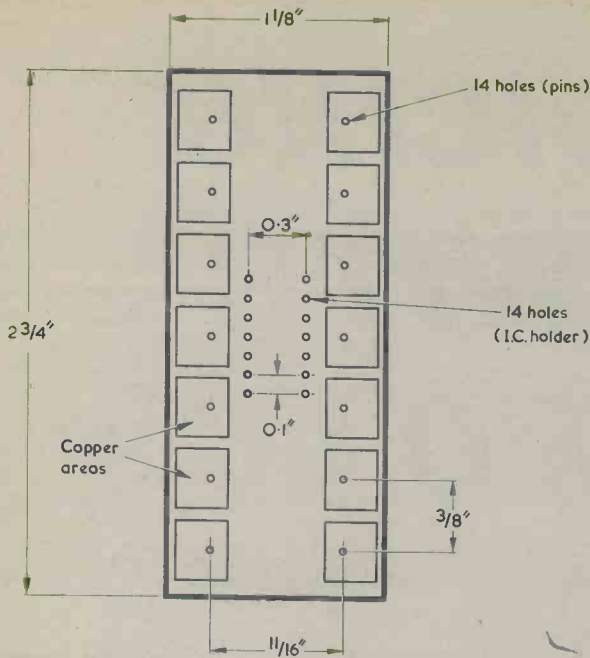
The copper pattern and holes required in the printed circuit board employed for the adaptor
